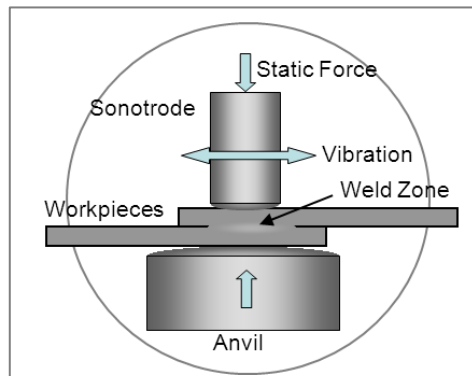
Ultrasonic welding process<sup>42</sup>
